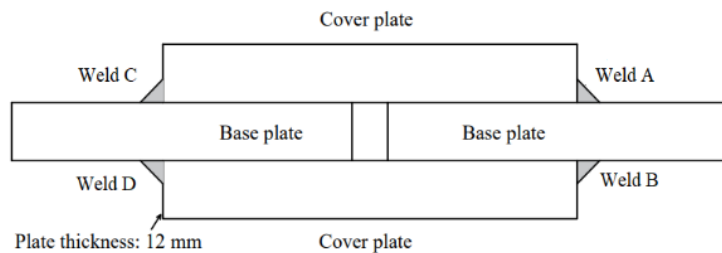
Section view of the transverse fillet lap-welded connection.
